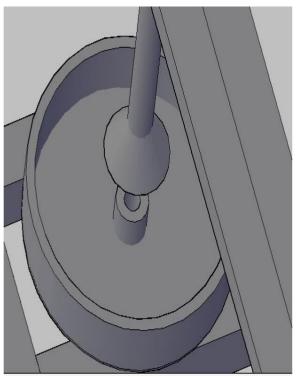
Corn Transformation Eyemanufacture Machine Knives
